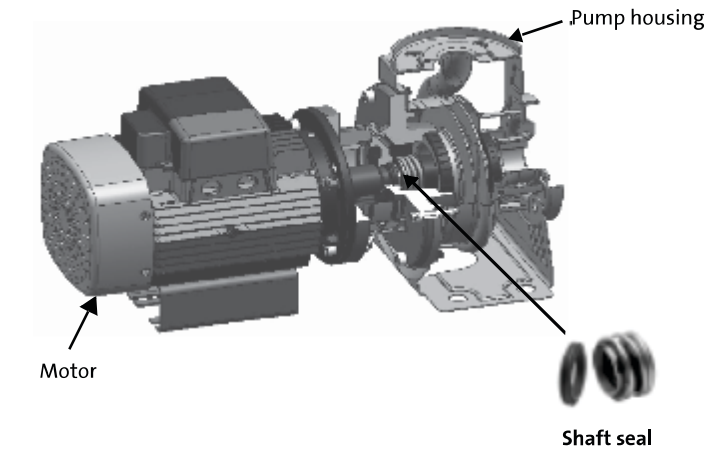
Shaft seal in an SNB pump (end-suction pump)
